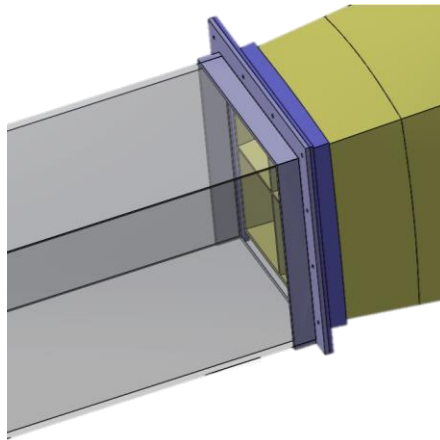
Assembled Test section – Diffuser flanges (Only a part of the Diffuser and Test section are shown for ease of view).
